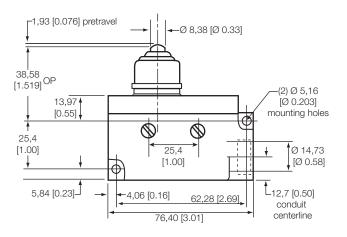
E7S Series, inline roller plunger, side mount, sealed
